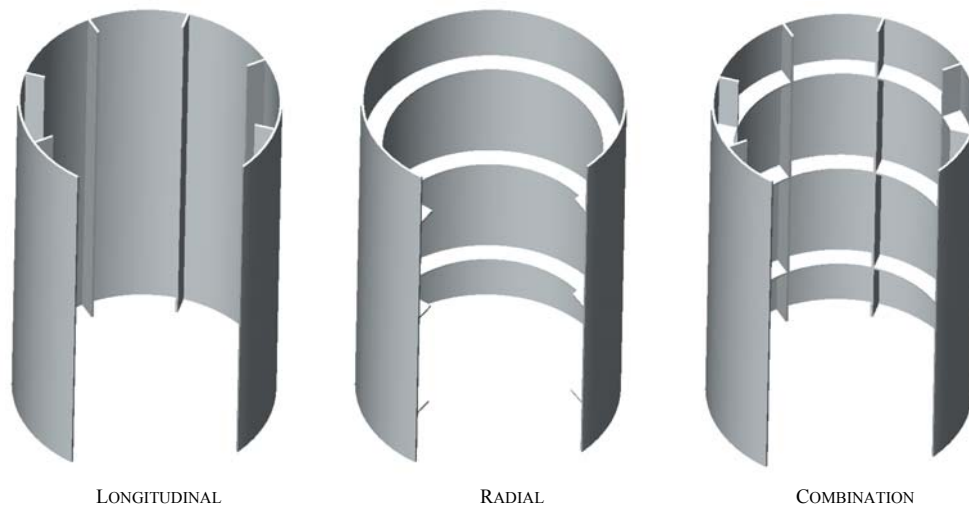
Proposed Solution 3 – Structural Stiffeners
